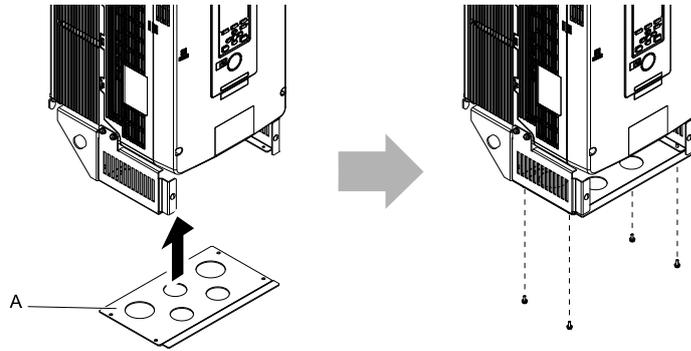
shows the locations of the screw holes on the bottom of the drive.
